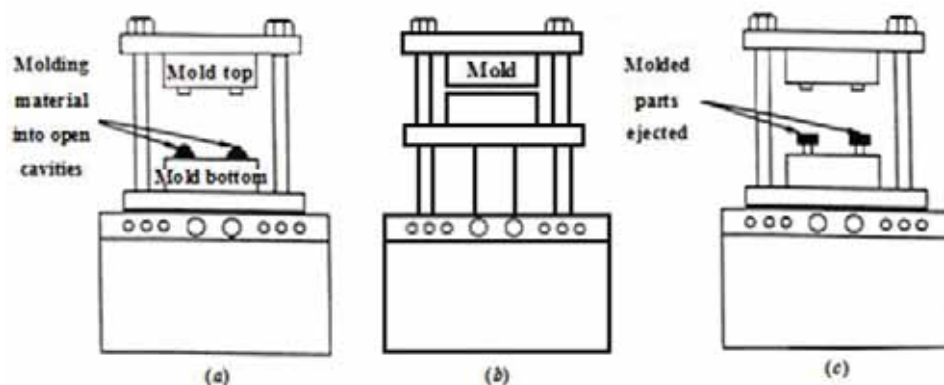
Compression molding sequence: (a) molding material is placed into open cavities; (b) the press closes the mold, compressing material in the hot mold for cure; (c) the press opens and molded parts are ejected from the cavities (Hull, 2006)
